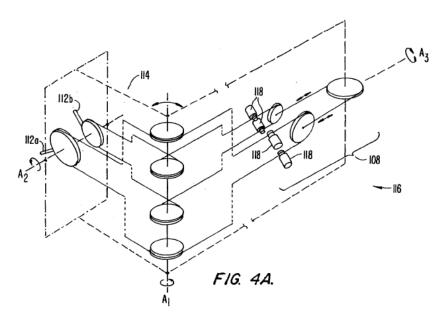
A is a schematic view of a drive system for the tool of Figure 4. *Id.* at 5:64–65. Drive system 116 mechanically couples first and second end effector elements 112a, 112b to driven elements 118 of interface 110, and translates mechanical inputs from driven elements 118 into articulation of wrist 114 about first and second axes A1 and A2. *Id.* at 9:24–31. Interface 110 is depicted in Figure 6, reproduced below:
